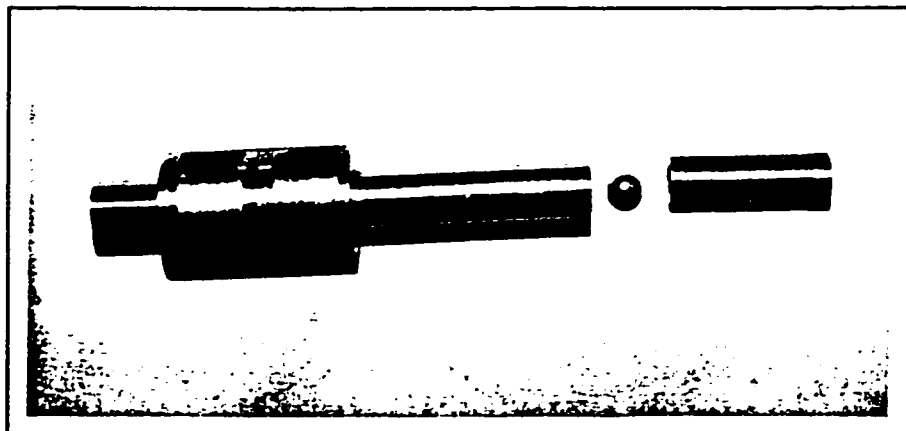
Collective picture for the test sample, locking cylinder and rigid ball
